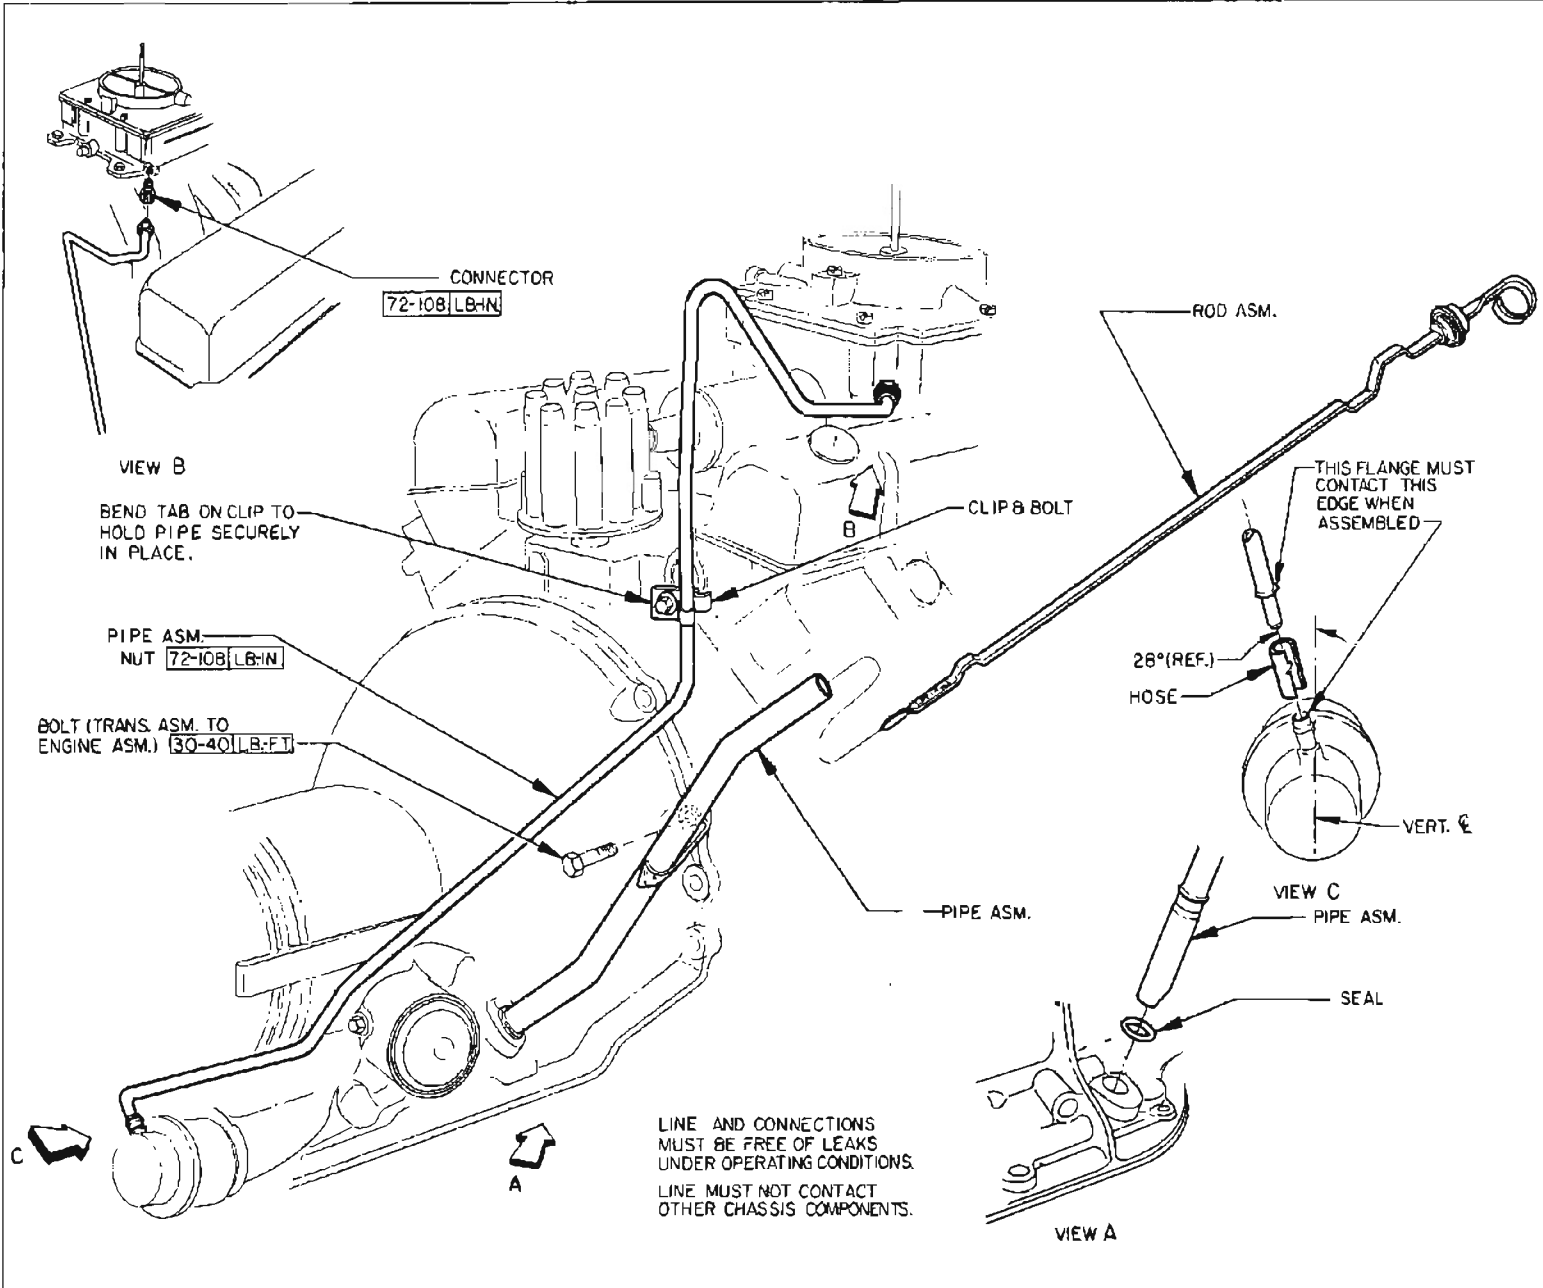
Oil Filler and Vacuum Modulator Pipes
